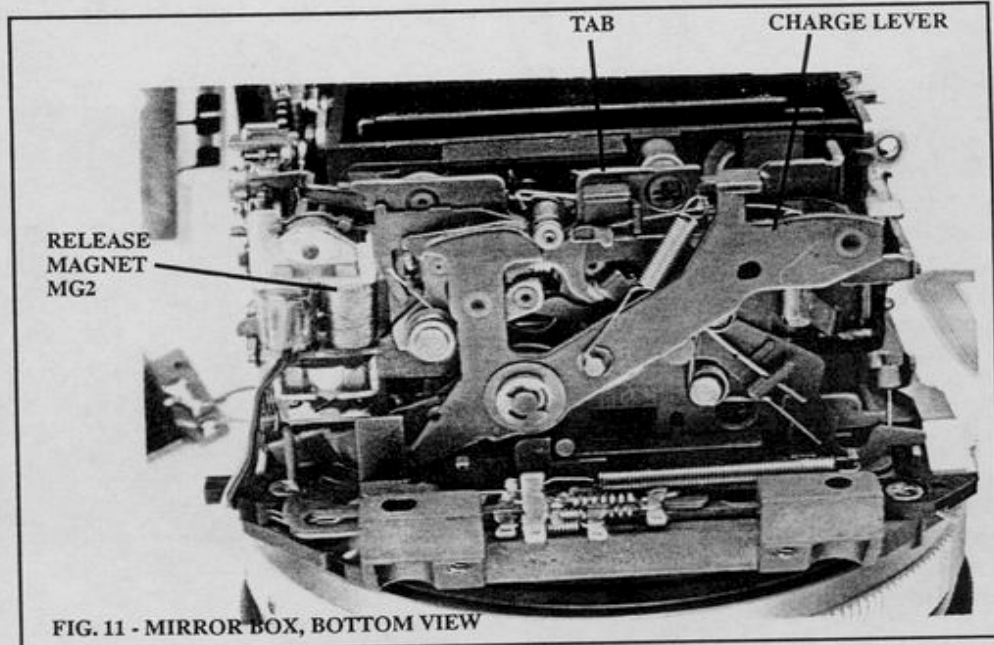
MIRROR BOX, BOTTOM VIEW
